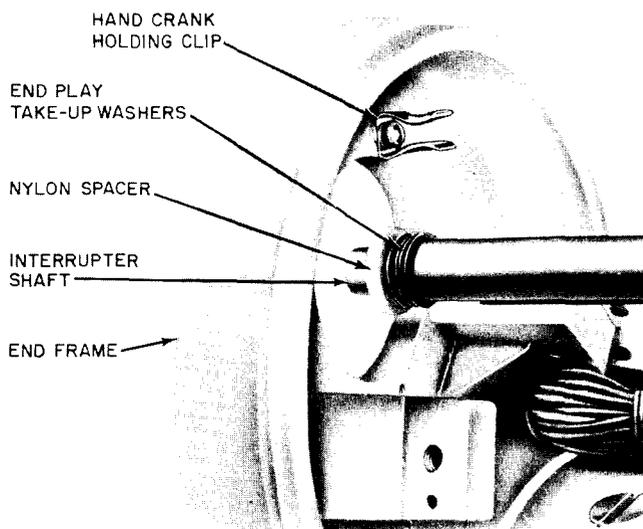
Tech Systems Company (formerly Electric Specialty Company) End Interrupter Shaft Details—Sleeve Bearing Type
